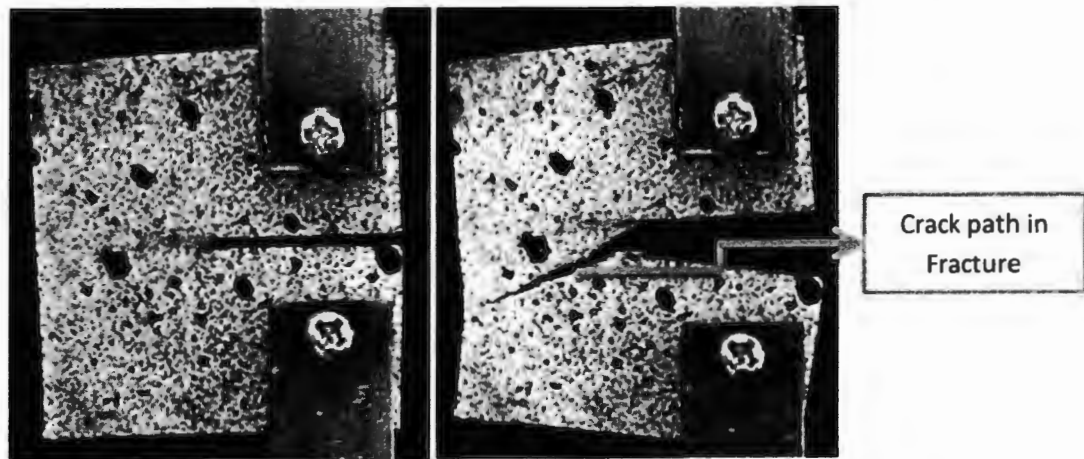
Transverse CT specimen before failure (left) and after failure (right)
